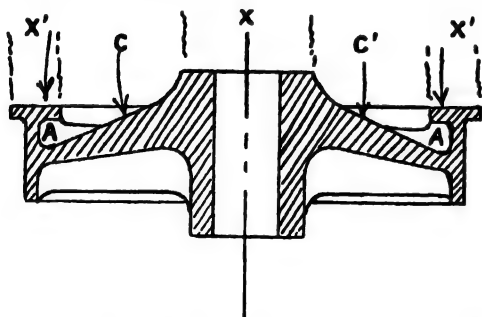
WHEELS WITH RIBS UNDER INTERNAL FLANGE AND HEAVY CONE CENTER.
